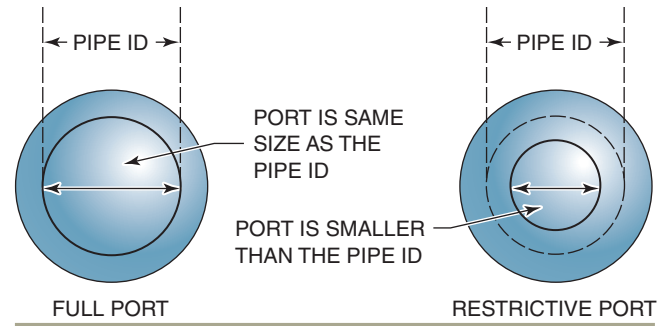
A full-port valve has a larger inside diameter than a restrictive-port valve.
